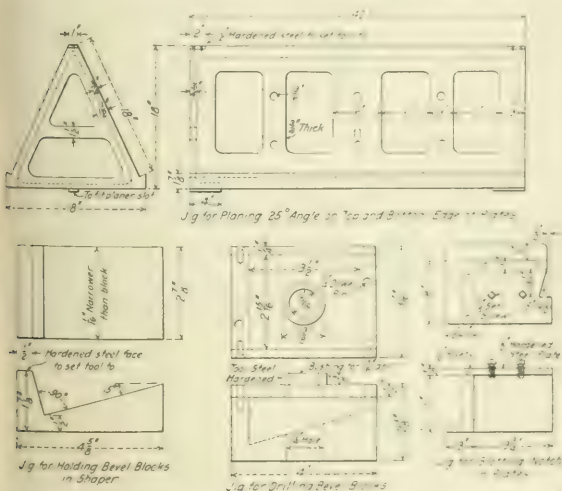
Jigs for Finishing Removable Side Motion Plates and Bevel Blocks.
